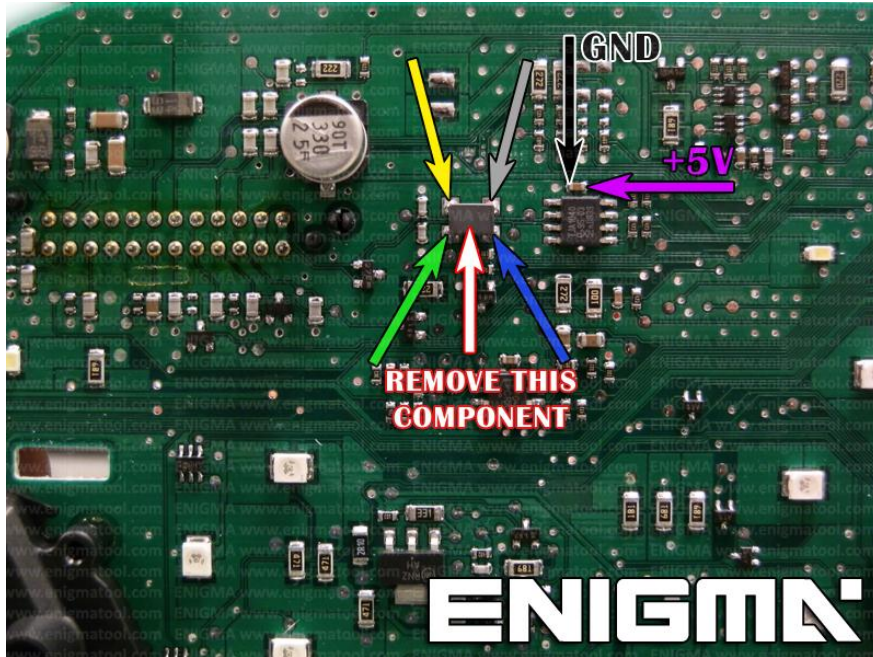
Remove component and solder cables according to the colors like shown on the photo above.
